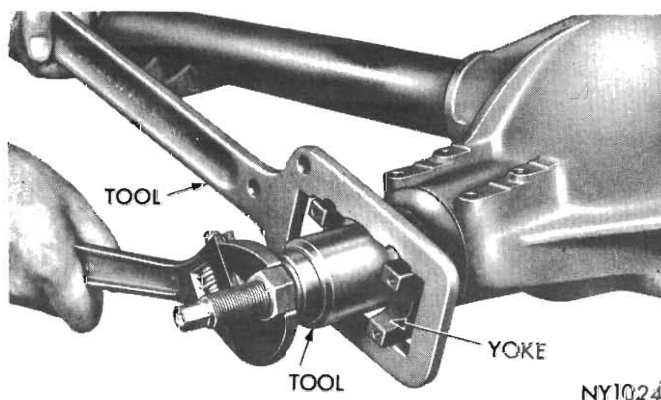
Installing pinion yoke using Tools E3C10L and E3C10B.
